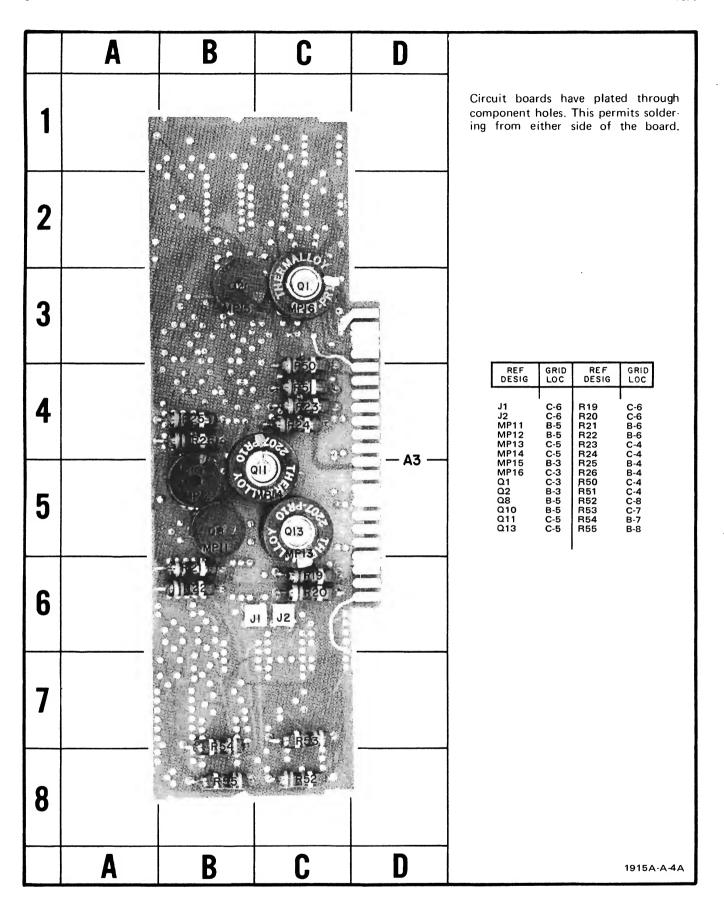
Negative Output Assembly, A3, Component Identification (Rear View)
